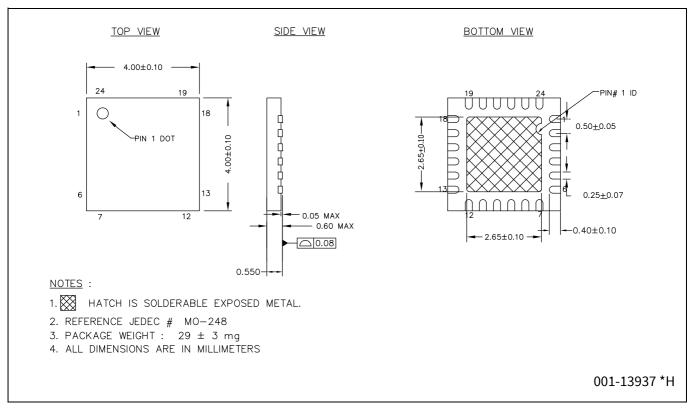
24L QFN 4×4×0.60 MM LQ24A/LQ24B 2.65×2.65 EPAD (SAWN), PACKAGE OUTLINE, (PG-VQFN-24)
